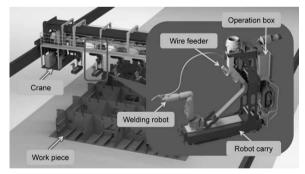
Assembly welding robot system for shipbuilding
